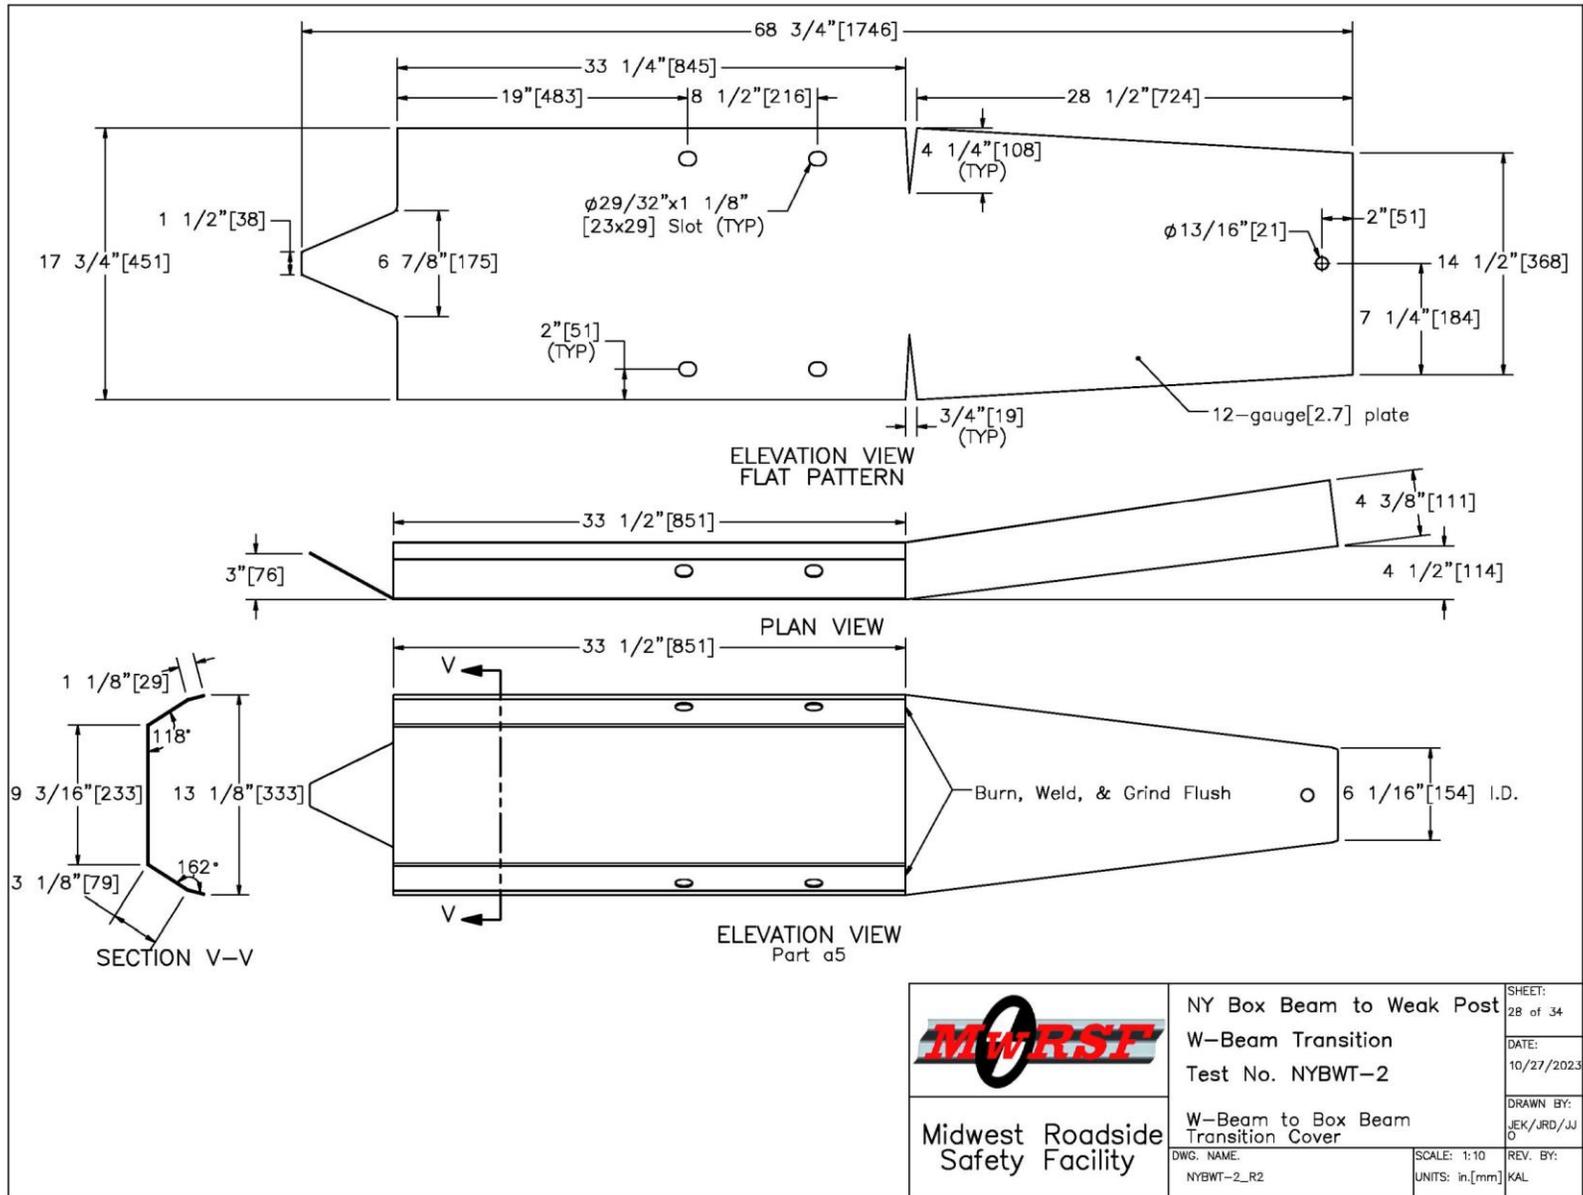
Box Beam to W-Beam Transition Cover, Test No. NYBWT-2
